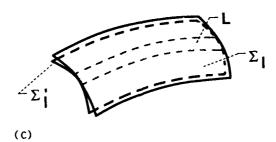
HELICAL GEAR AND GENERATING TOOL SURFACE.
